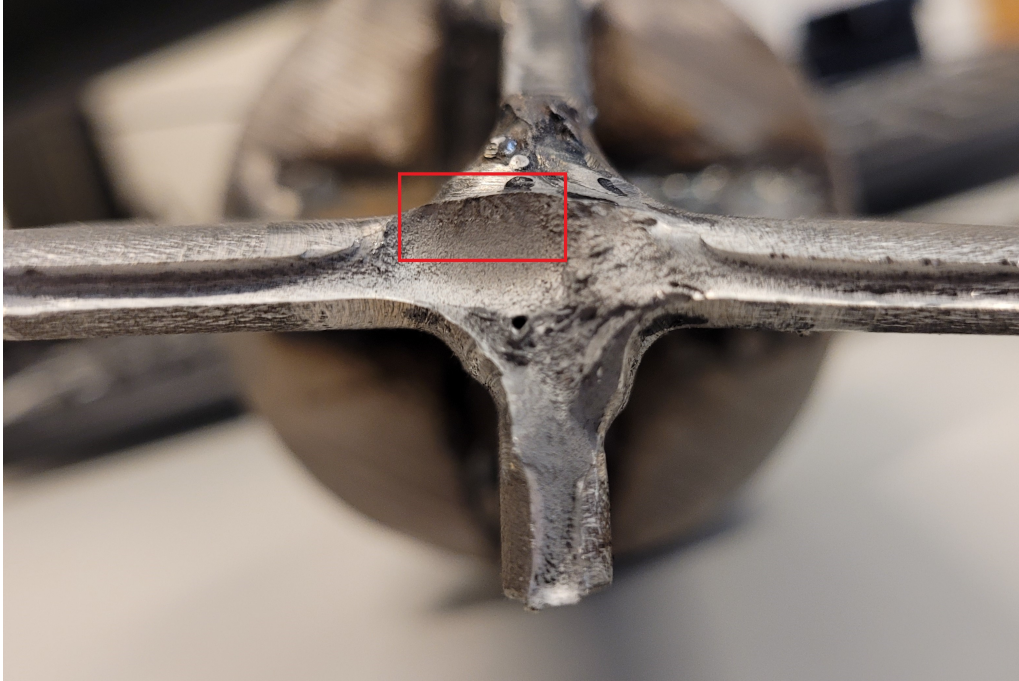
Fracture surface of specimen subjected to fatigue failure
